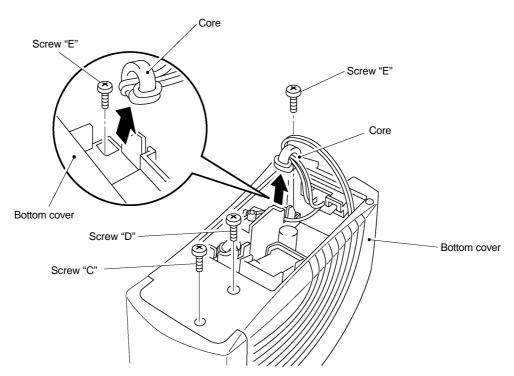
Removing the Screws Securing the Bottom Cover
